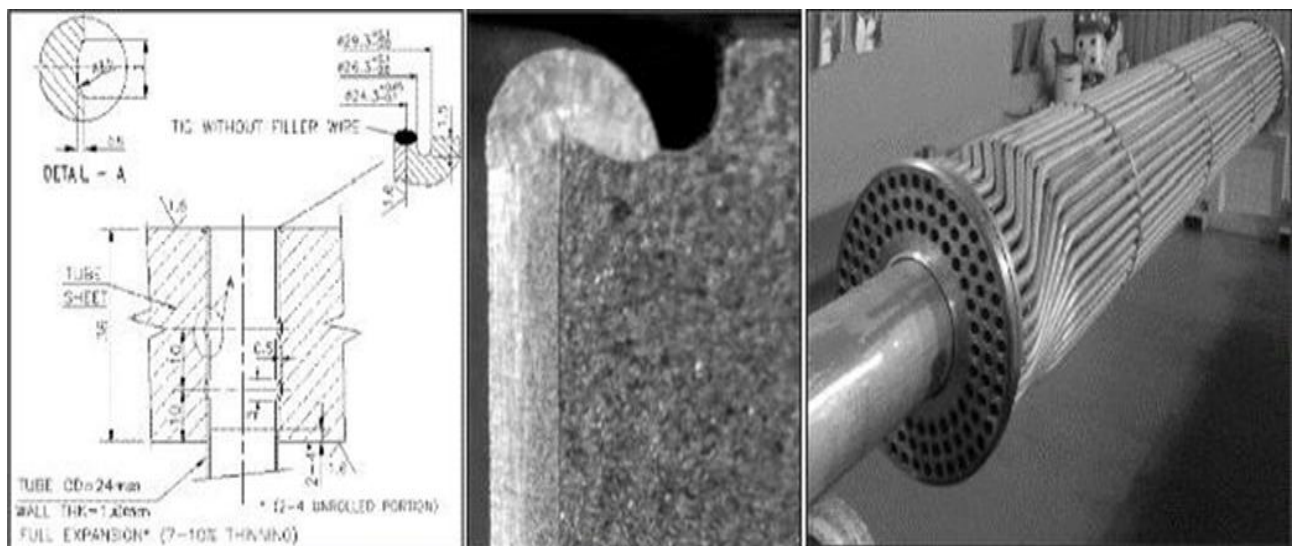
Tube to tubesheet joint details and tube bundle of DHX.
